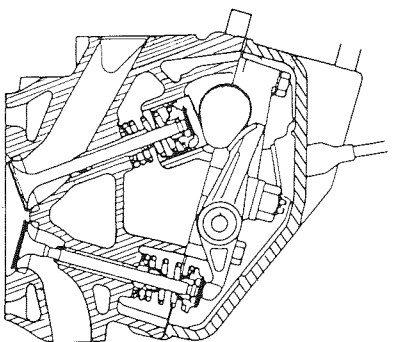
King/Dawtry valve gear (Dolomite Sprint)
